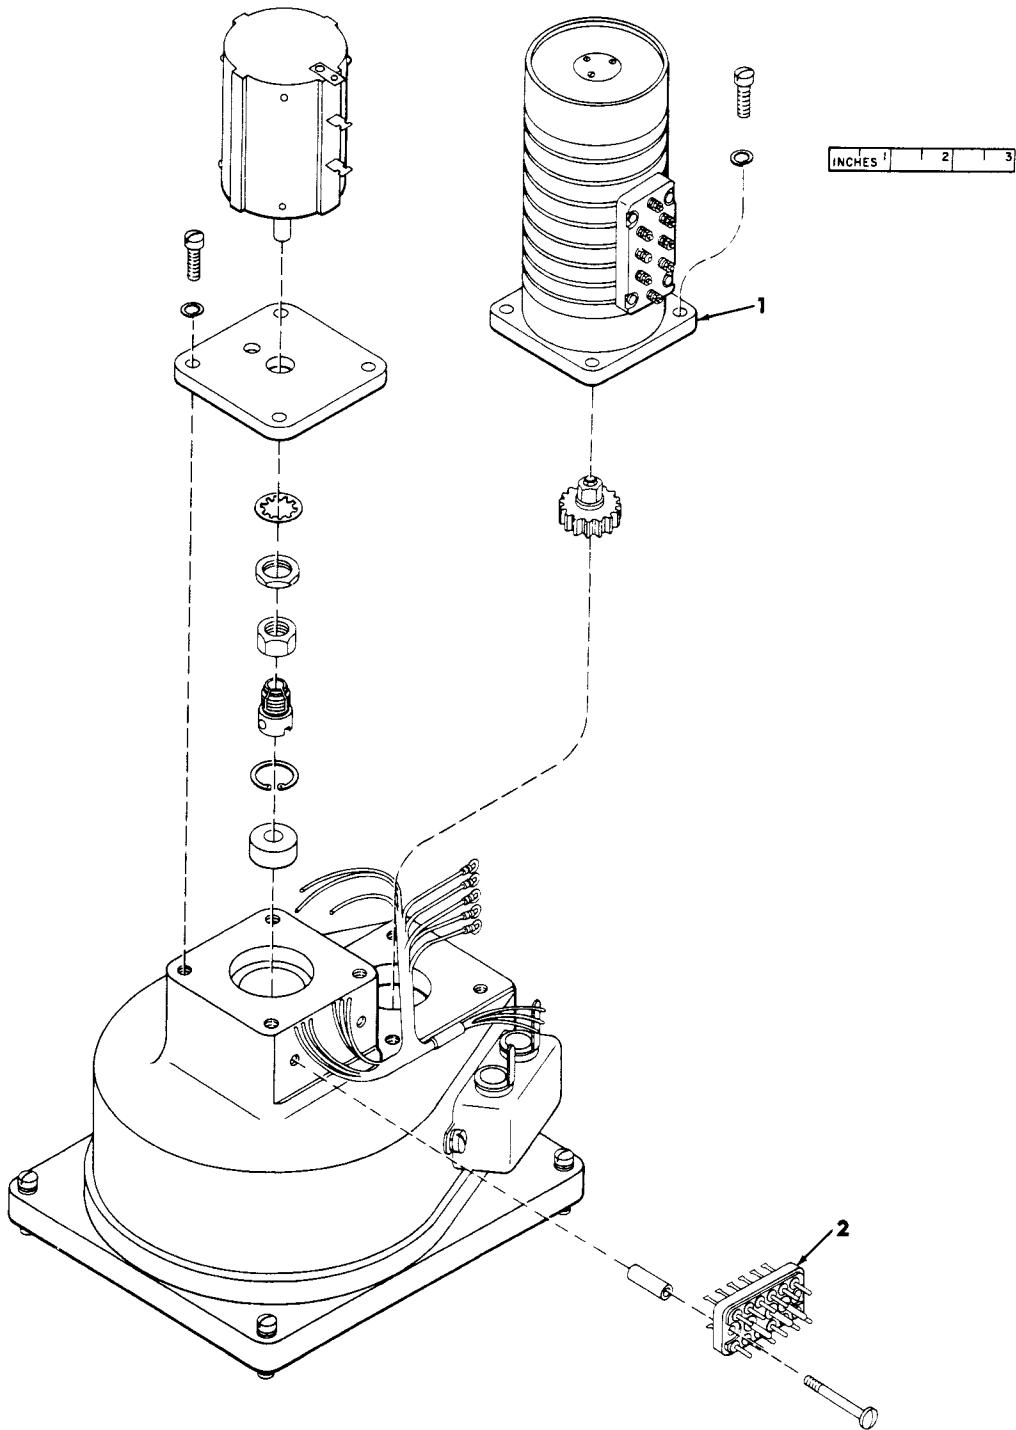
Simulator, radar signal SM-76/M (8009261)—partial exploded view
